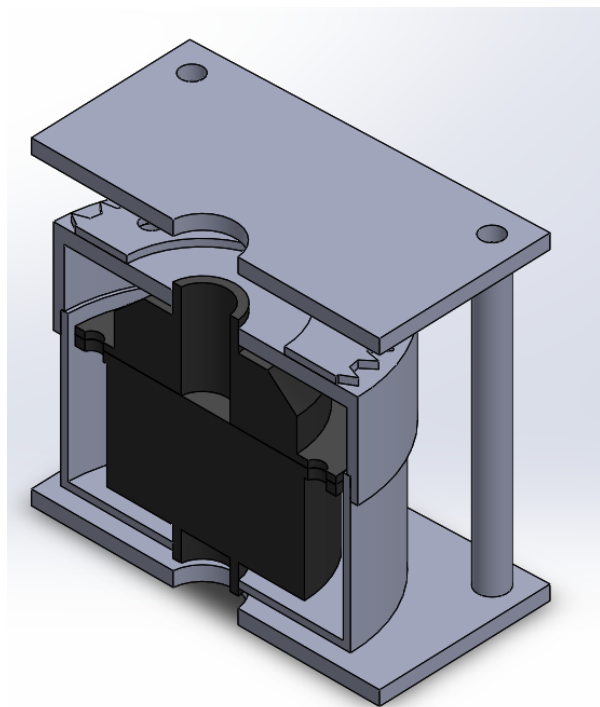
Cross Section of Housing with Sprocket and Mounting Plates
